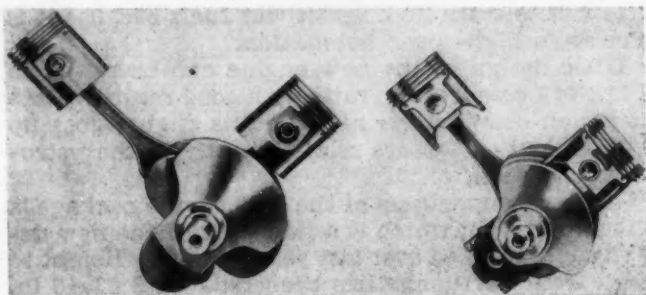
Crankshaft and piston assembly of the 1948 (left) and 1949 Cadillac engines compared
